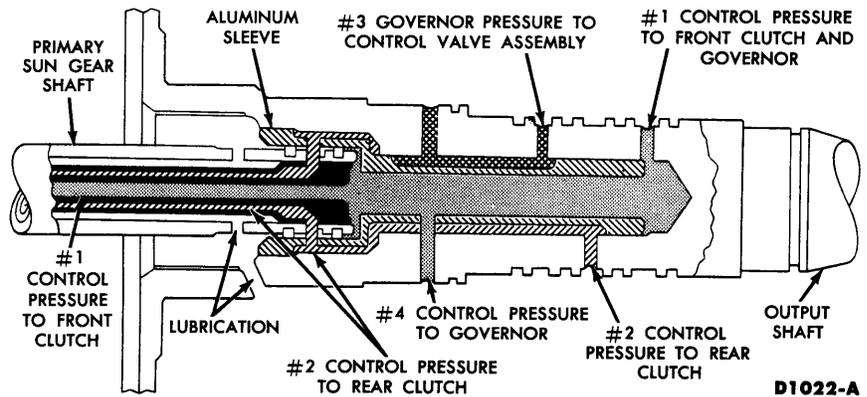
Output and Primary Sun Gear Shaft Fluid Passages
